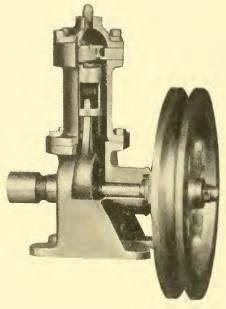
SECTIONAL VIEW OF ABSOPURE COMPRESSOR.
